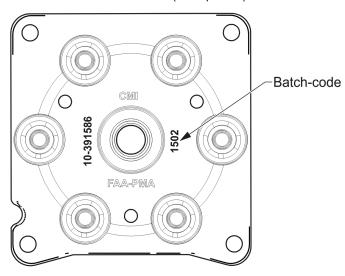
Distributor Block Batch-Codes, (S-20, S-200, typical)
